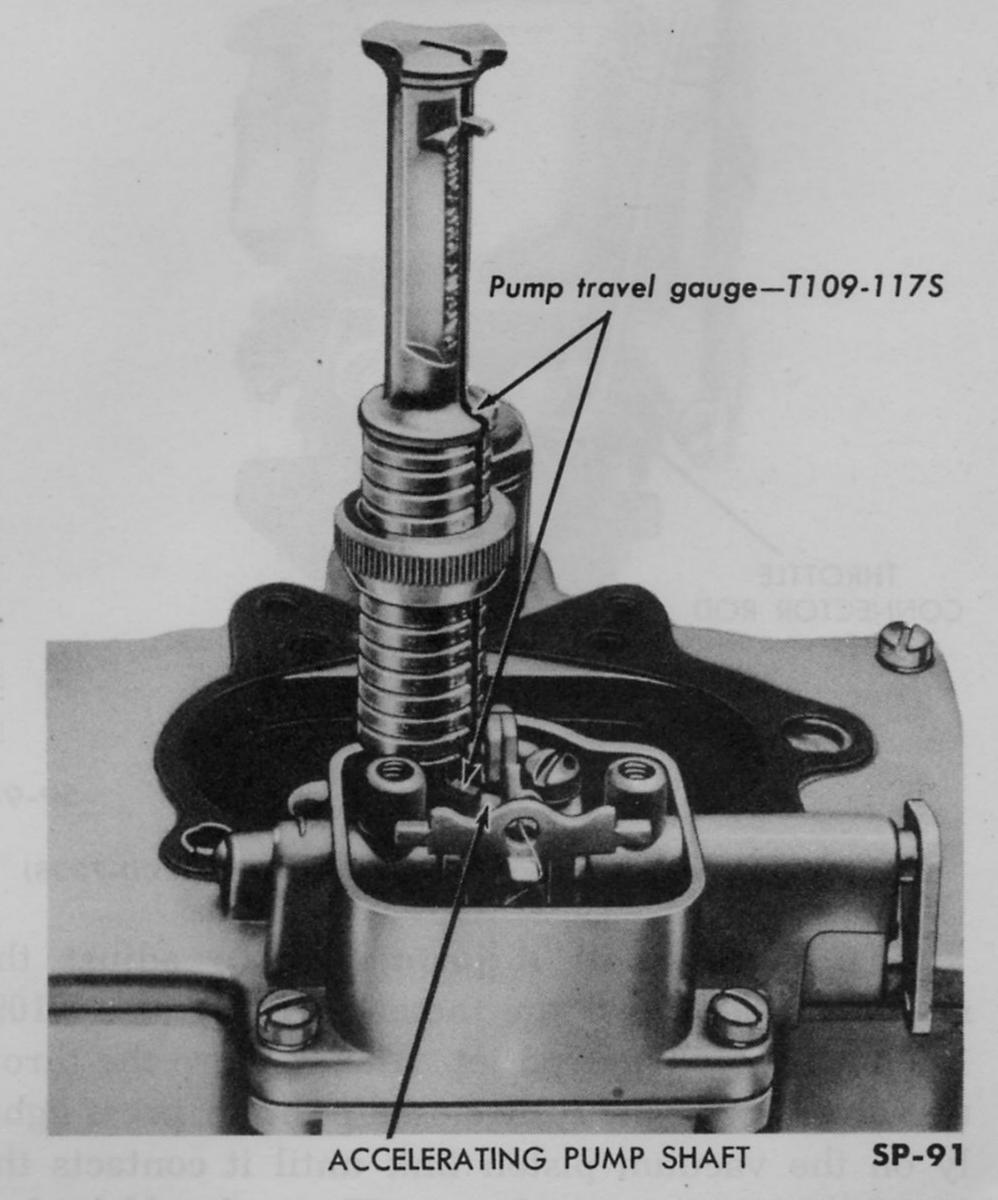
Checking Accelerating Pump Travel (WCD-723S)
